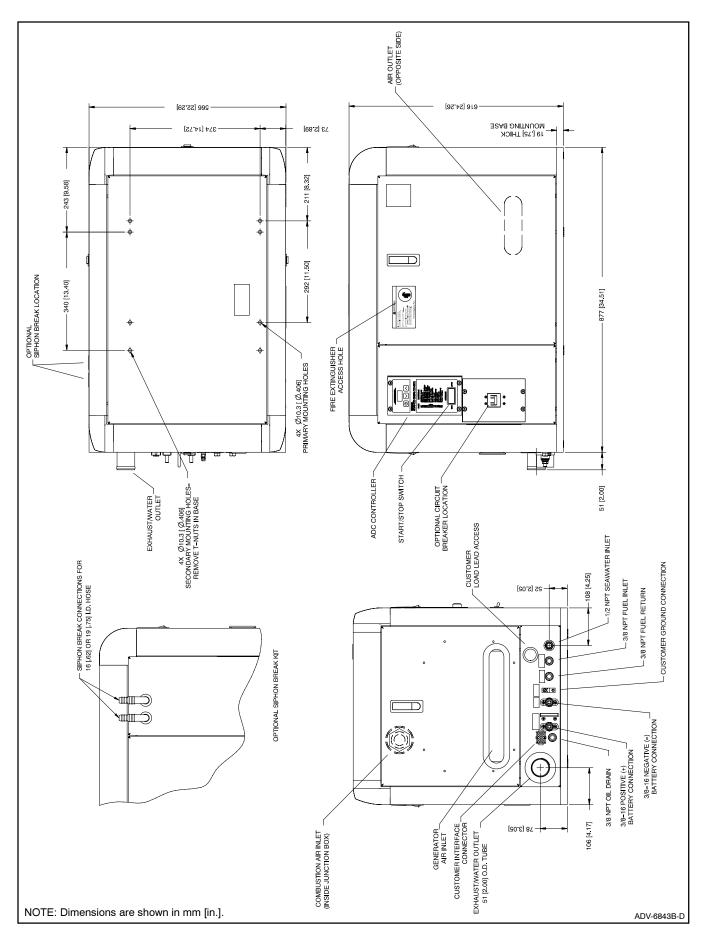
Dimension Drawing, 8EOZD and 6.5EFOZD with Sound Shield
